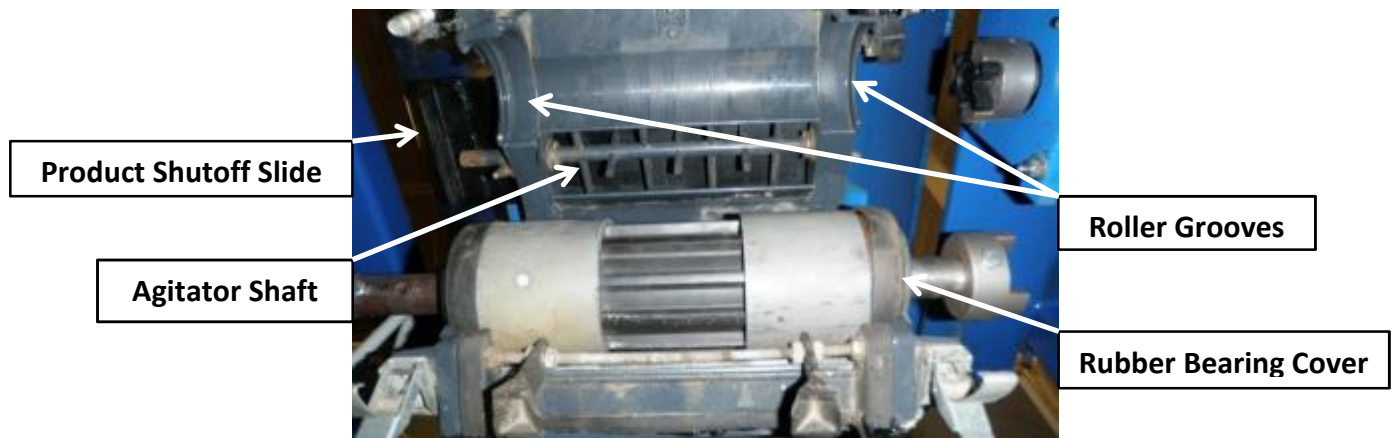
Bottom view of opened metering assembly with the meter roller pulled out.
